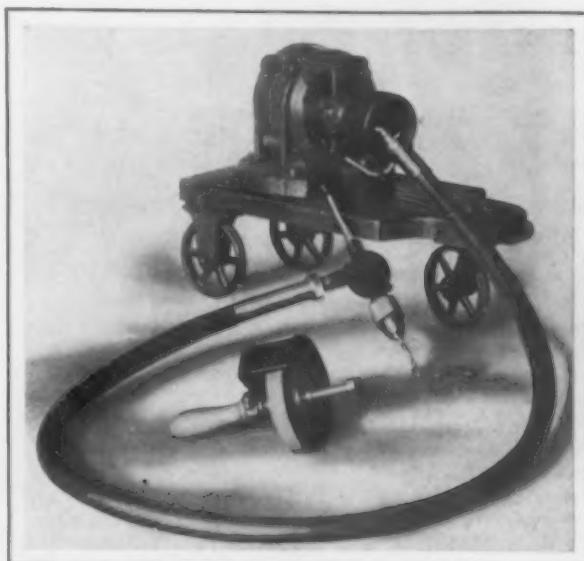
A New Type of Flexible Shaft Having a Special Clutch and an Improved Core
